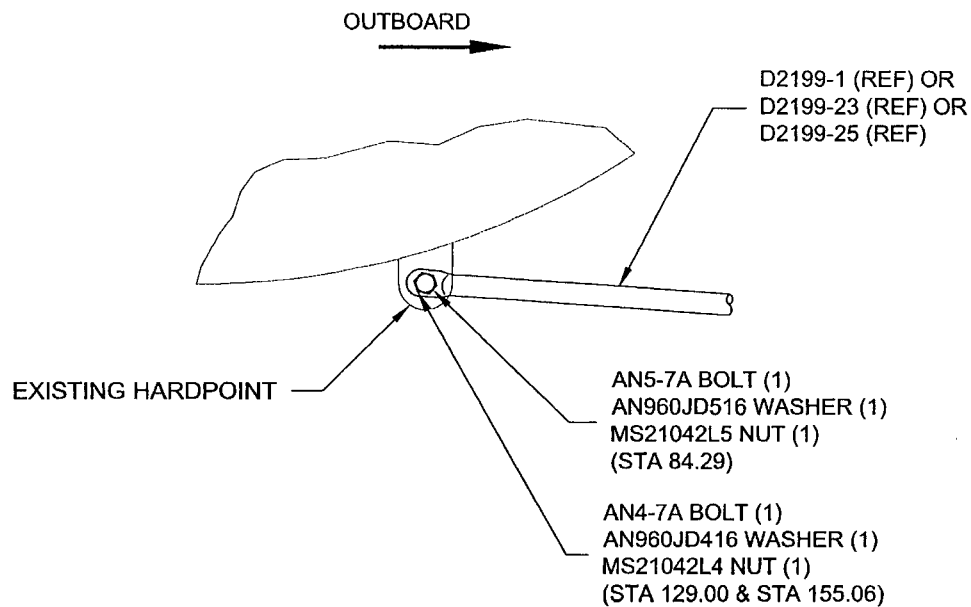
Detail 'F' Strut to Hardpoint Attachment
